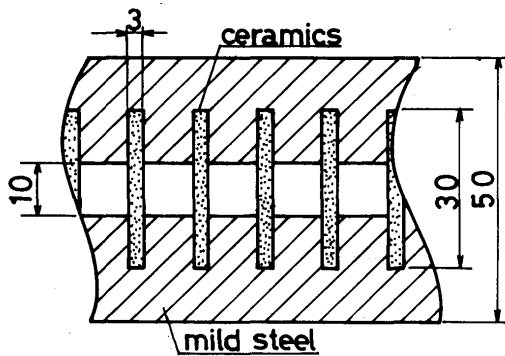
Schematic drawing of test piece with parallel-arranged ceramic strip fixed by jig of steel.
